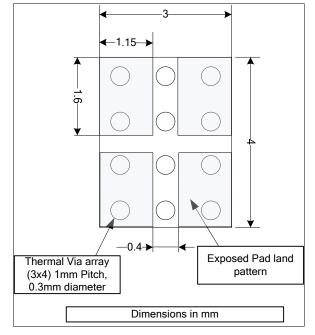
Recommended Solder Printing Paste Mask Apertures (CS)
